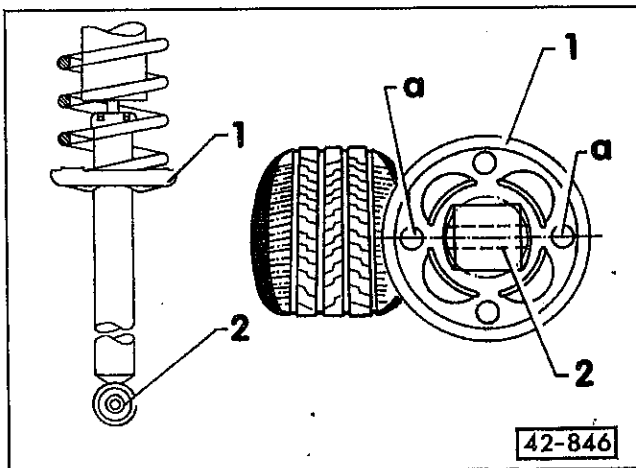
Hole (a) in spring seat (1) must be aligned with bushing eye (2) in shock absorber.
